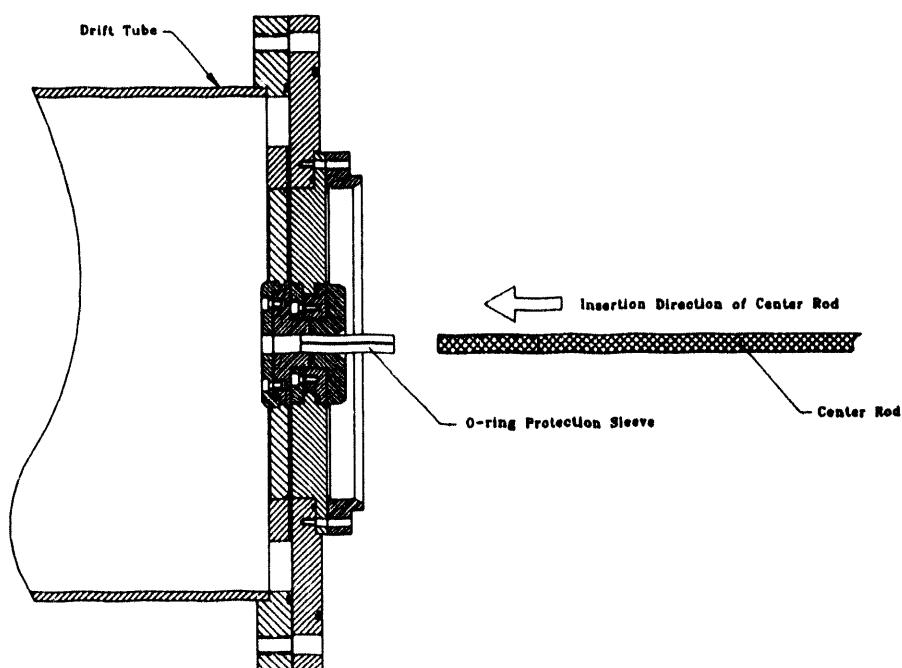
Position of the O-ring Protection Sleeve in the Downstream End Plate Subassembly
